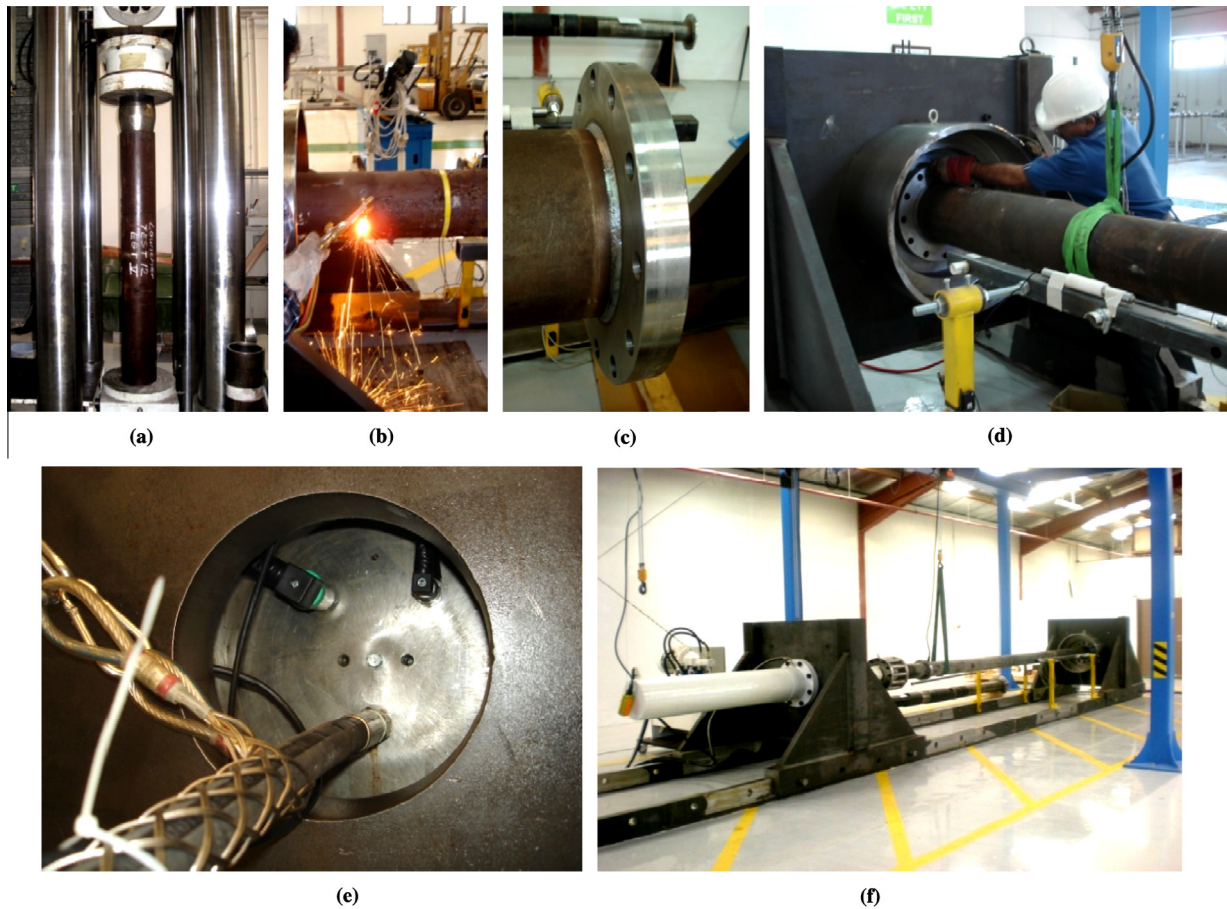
Experimental test setup procedure: (a) create launcher using mechanical pressing machine; (b) welding launcher to longer pipe section; (c) flange welded to the launcher; (d) mounting tubular-mandrel system in the test-rig; (e) high pressure line connected to the flange; (f) pipe ready for test.
